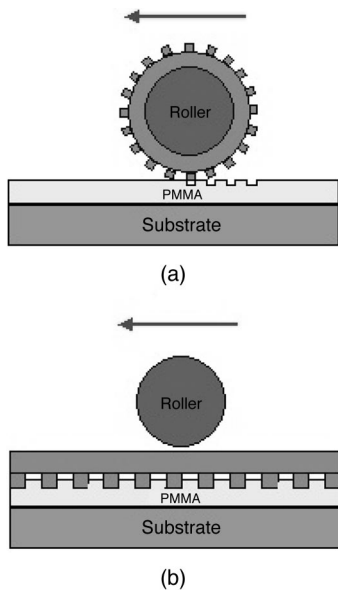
Two ways for roller nanoimprint: (a) imprints using a cylinder mold: bending a compact master disk into cylinder shape, mounting it around the roller, and rolling the roller on the substrate; (b) imprints using a flat mold: putting the mold directly on the substrate, and rotating the roller on top of the mold.
